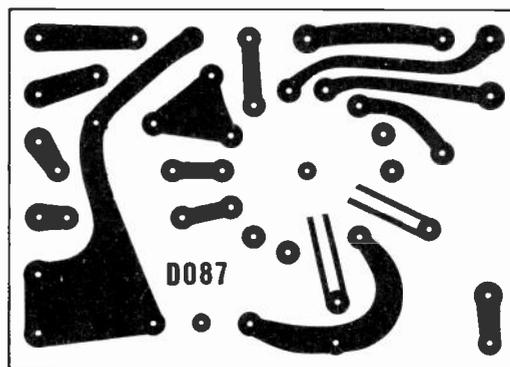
C.r.t. base board print pattern – the component layout will be shown next month. Shown full size.
